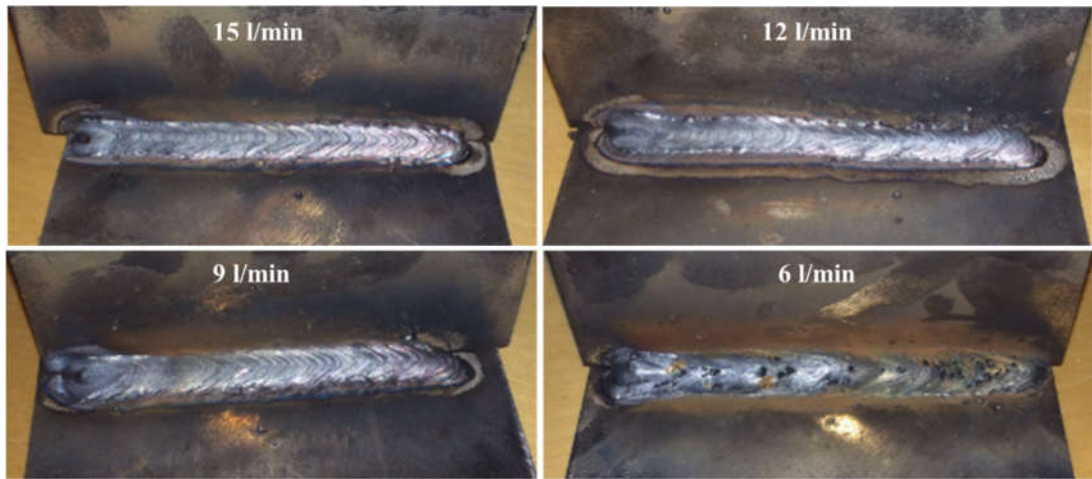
GMAW fillet weld samples, produced using pure Ar and solid wire at varying flowrates. Porosity is present only for the 6 l/min case, due to insufficient coverage.
